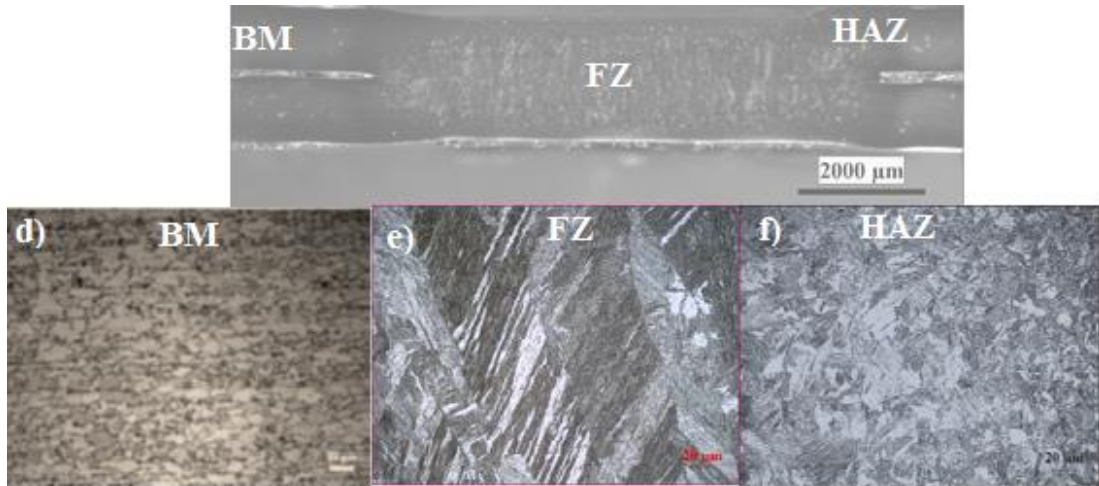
The weld zone profile and its microstructures of DP600 weldment joined with 4.5 Bar electrode force with 4kA welding current. d) DP600 base metal (BM), e) DP600 Heat Affect Zone (HAZ), f) DP600 weld nugget (FZ).
